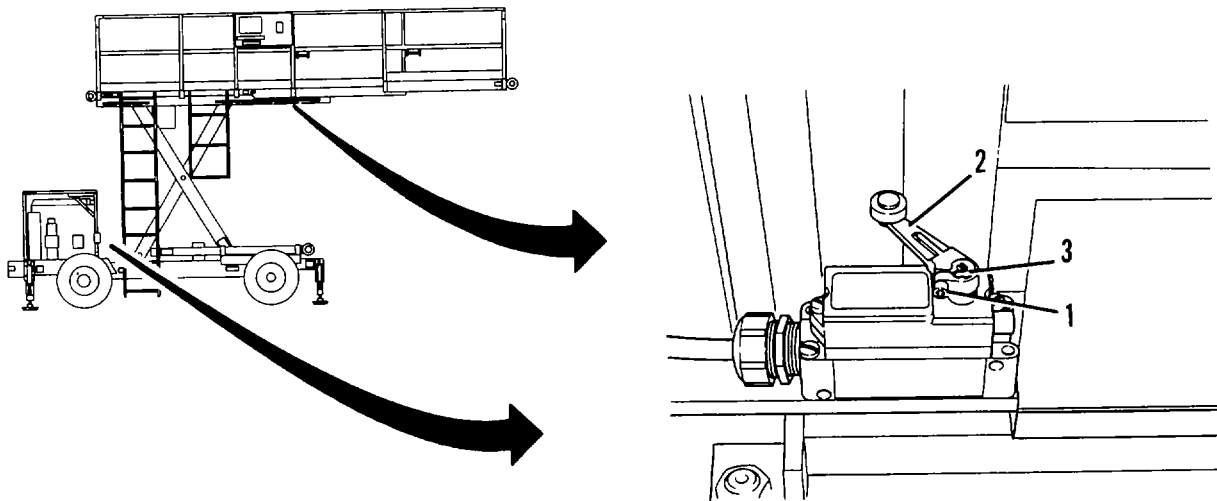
Limit Switch Adjustment (Sheet 1 of 2).
